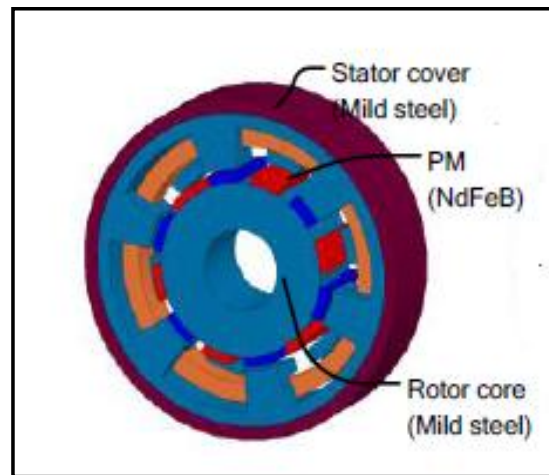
Single-sided TFPM machine with stator bridges and axially magnetized magnets [83].
